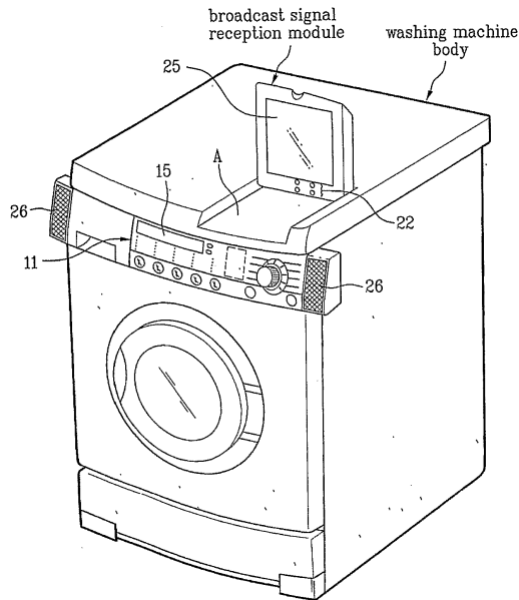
A view of a washing machine which has a broadcasting receiver.
